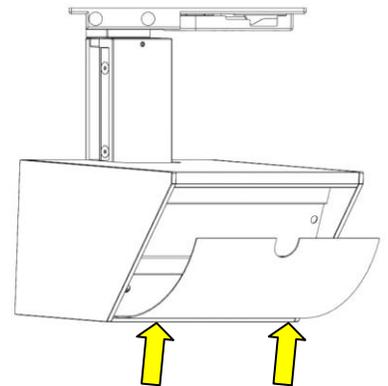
Insert accessory Gel by inserting bottom edge, bending Gel, and guiding it into the top groove.
